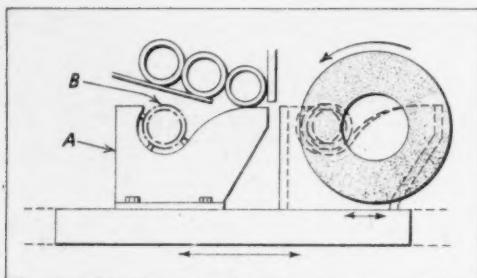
Diagram showing the work handling arrangement on the Scrivener duplex face grinding machine for rings
